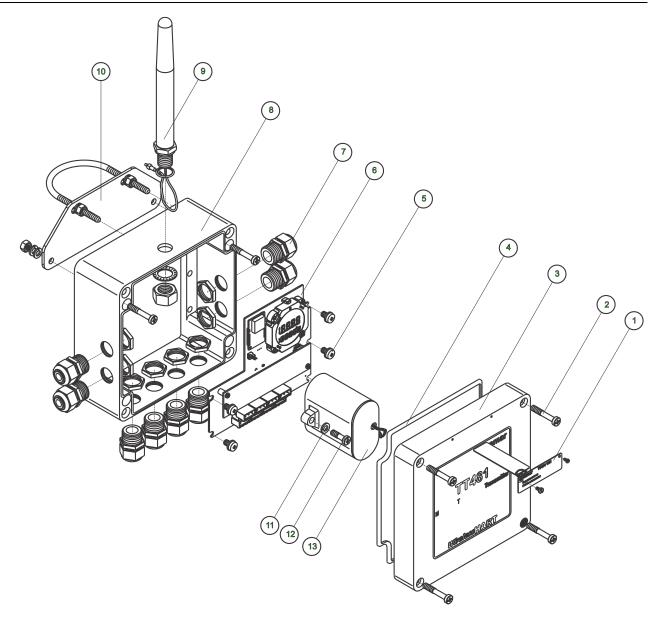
(b) – Exploded View - TT481 WirelessHART<sup>TM</sup> with 8 Channels
